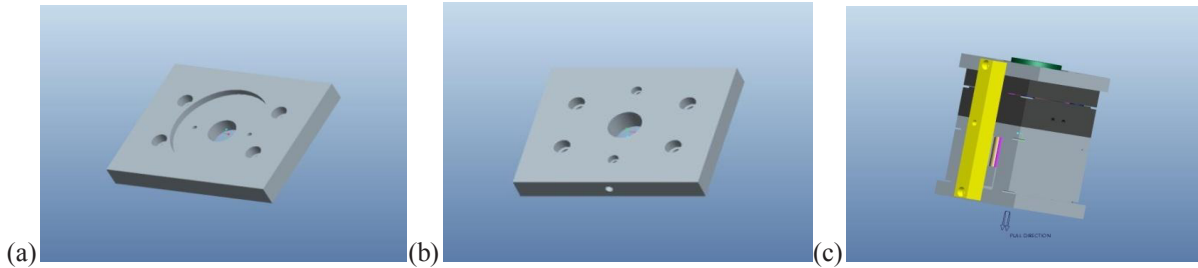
Modelling of (a) Top plate (b) bottom plate (c) assembly
